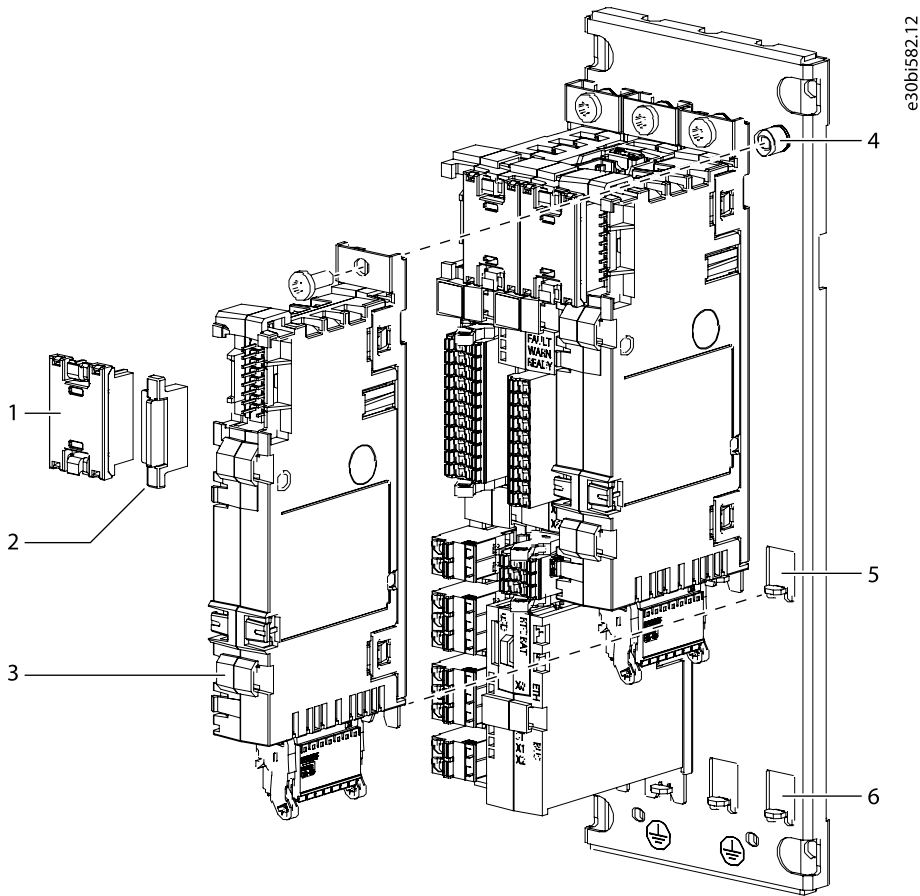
Installing a Board to the Modular Control Unit Mounting Plate
